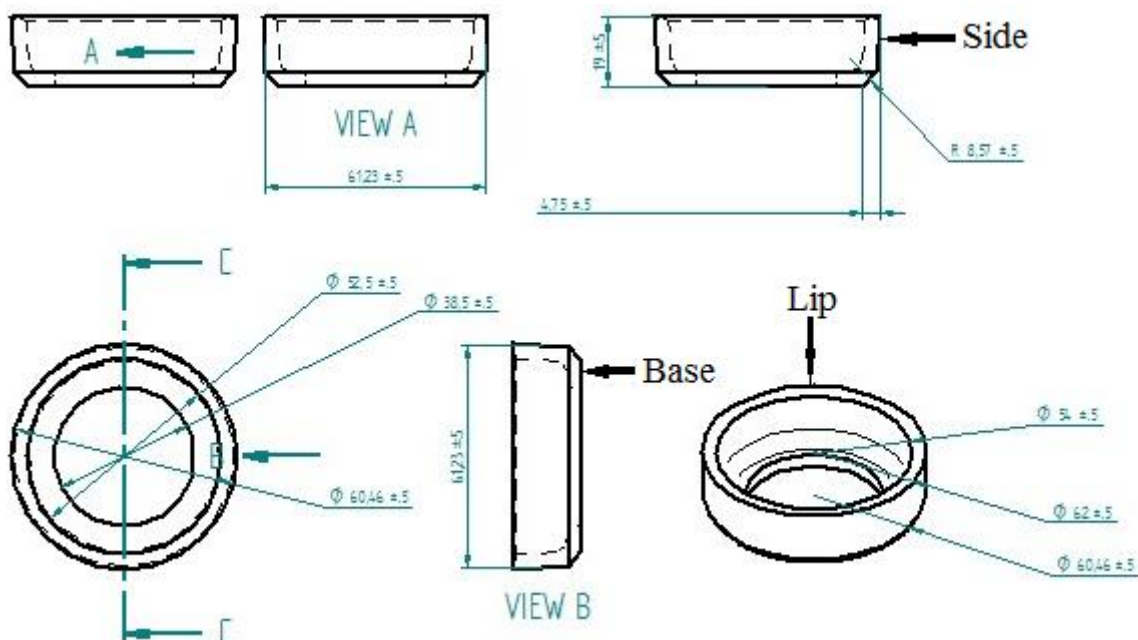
Detailed drawing of a typical piston seal. Microscopy analysis was done along the seal base, lip and side
